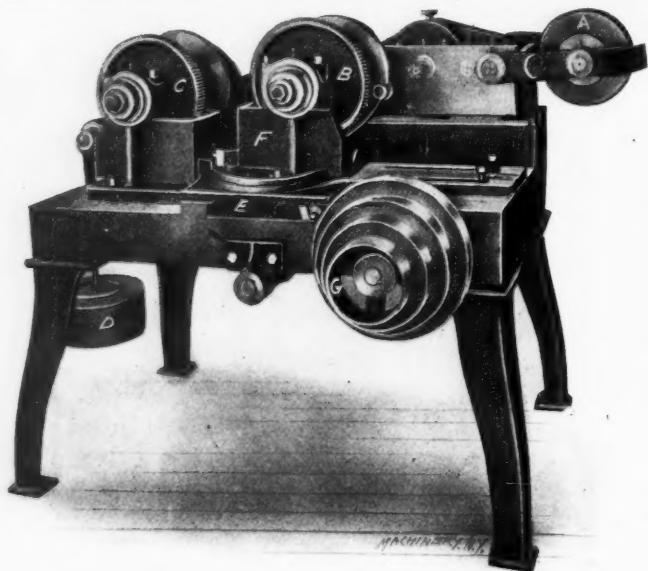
Driving Side of Machine, showing Adjustment of Follow Roll Bracket on Cutter Slide
